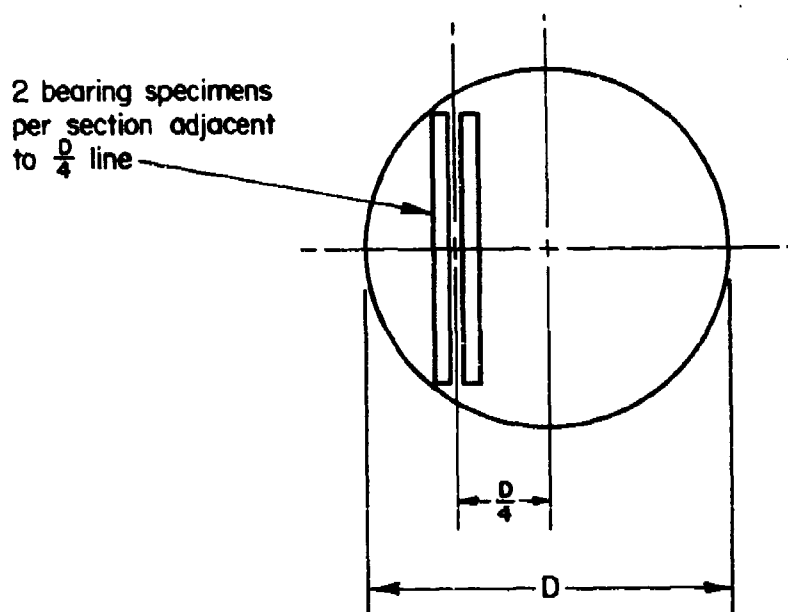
Cross-sectional location of longitudinal bearing specimens for all diameters of Inconel 625 and Inconel 718 bar.
